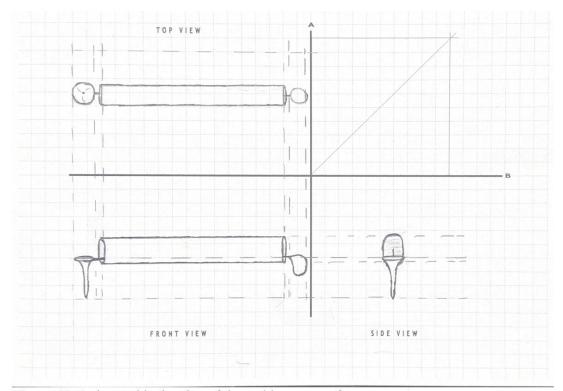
Orthographic drawing of the rapid prototype for concept 4
